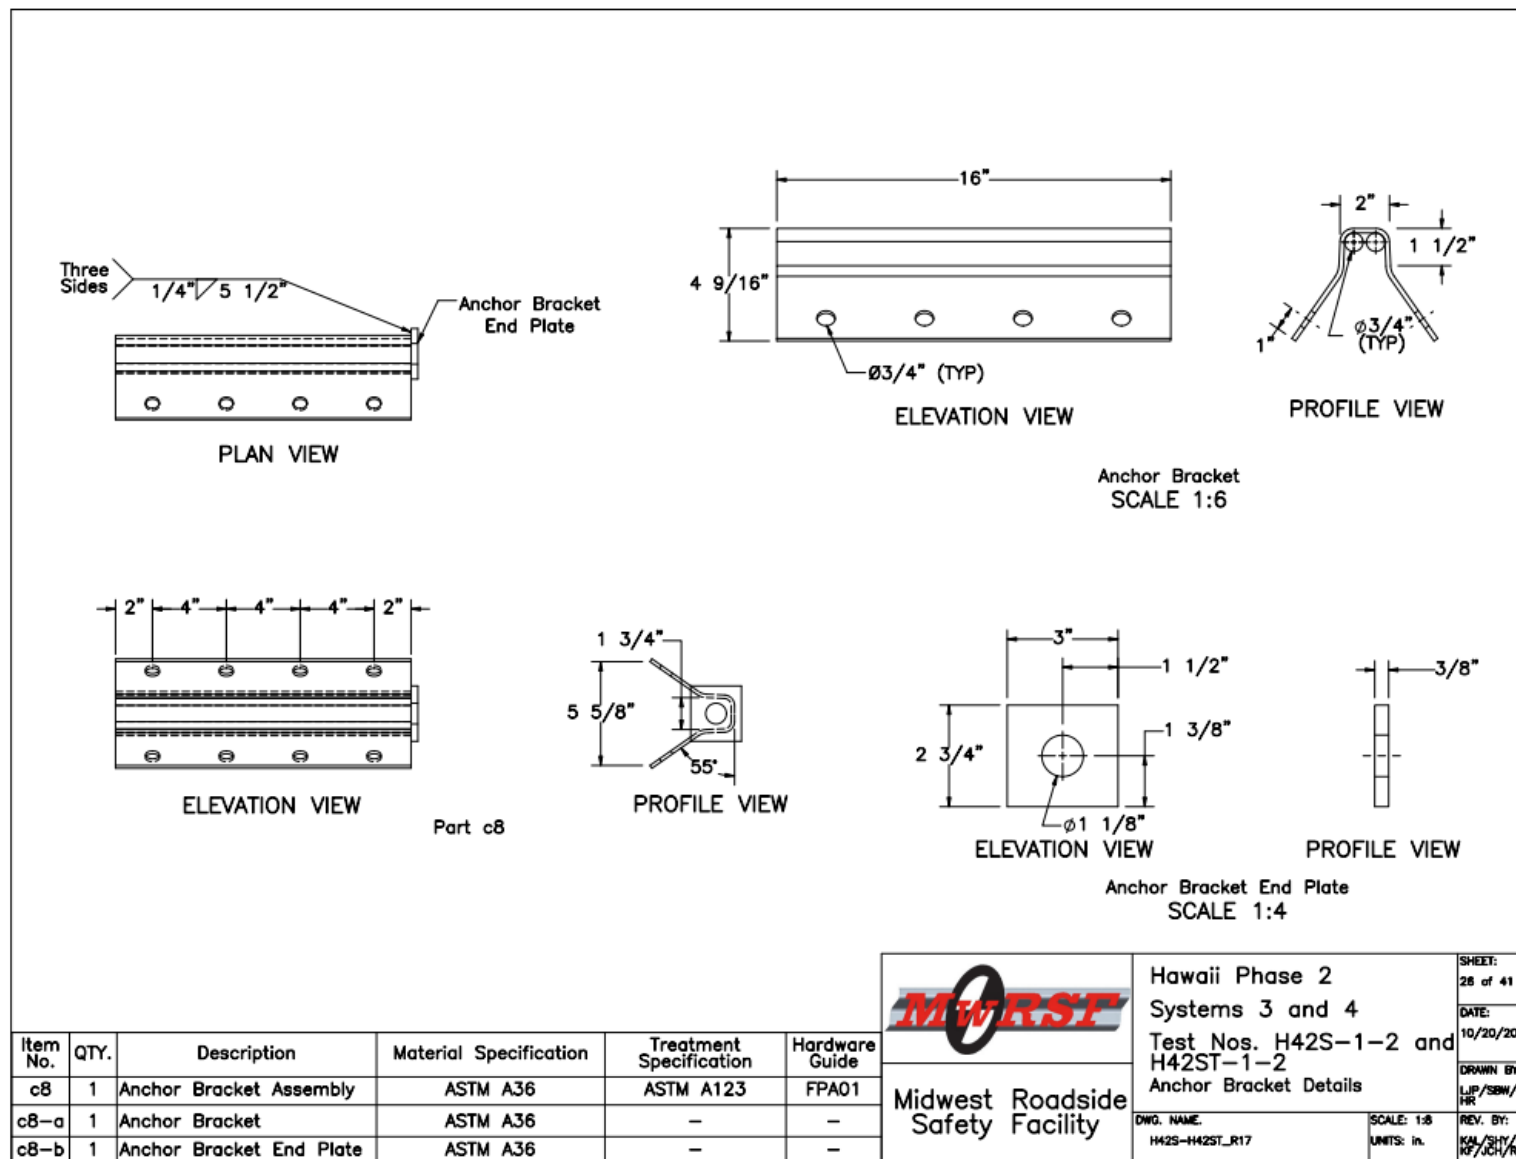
Anchor Bracket Details, Test Nos. H42ST-1 and H42ST-2
